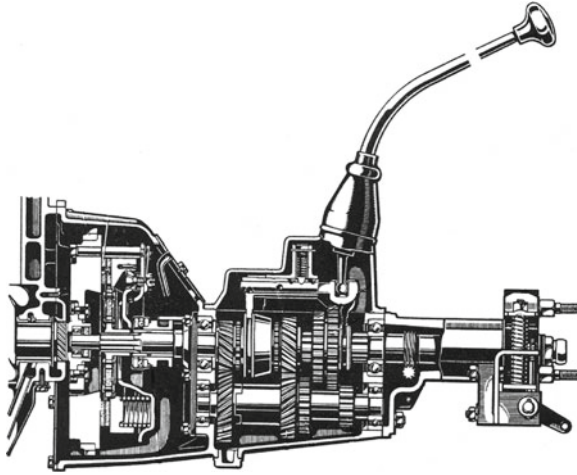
Four speed gearbox of the FIAT Balilla of 1934. The drawing shows a longitudinal cross section; the rear of the gearbox has a sliding train for the first, second and reverse speeds; the front features synchro-mesh gears for the third and fourth speeds (from Genta Morello 2009)
